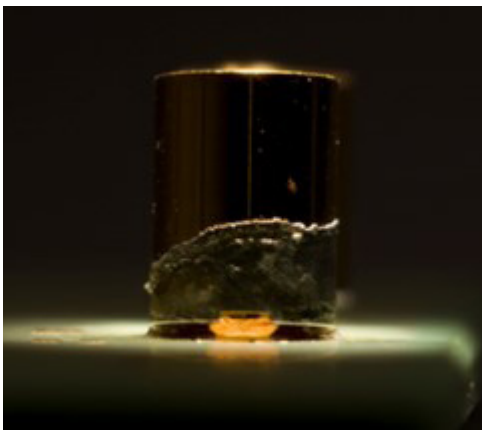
PCB Connector with PTFE tilting and lifting off board during reflow.
